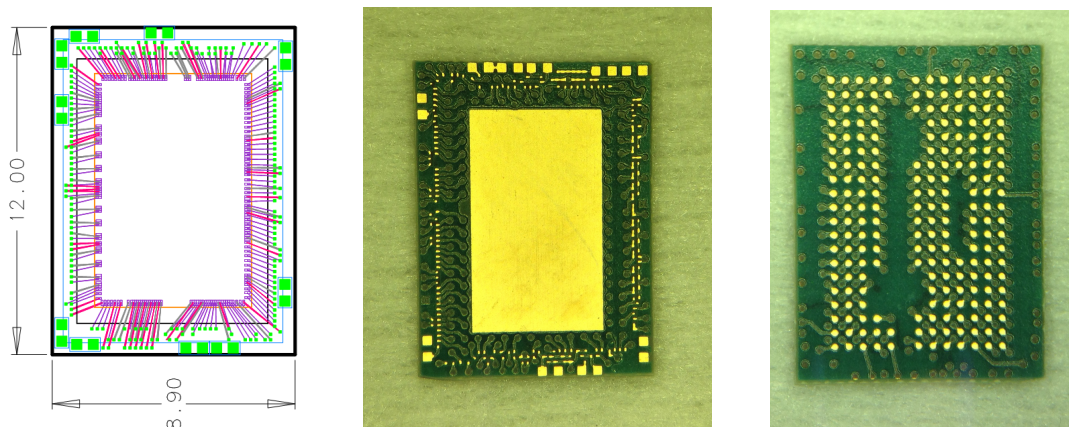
Layout of the carrier board with bonding wires and passive components (left) together with photos of the top (middle) and bottom (right) surface, respectively, of one circuit board.
